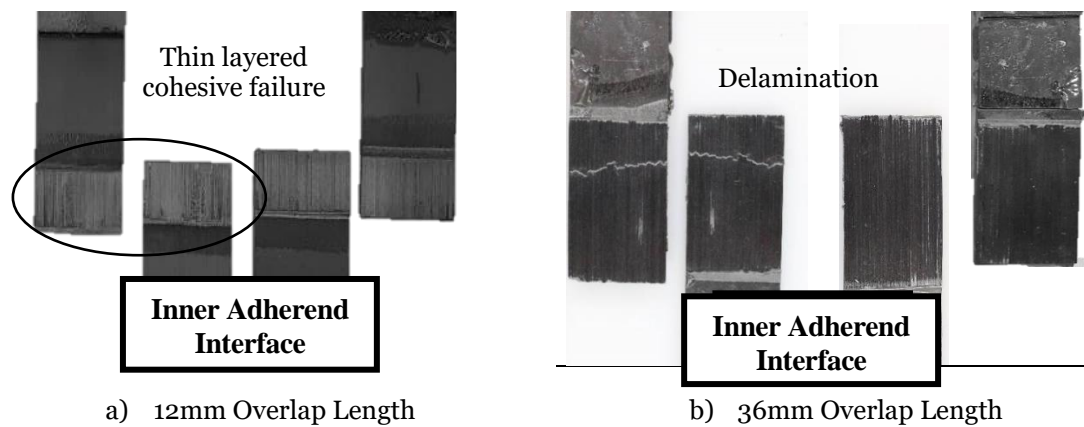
Fracture surfaces for 4mm inner adherend cases at RTD
